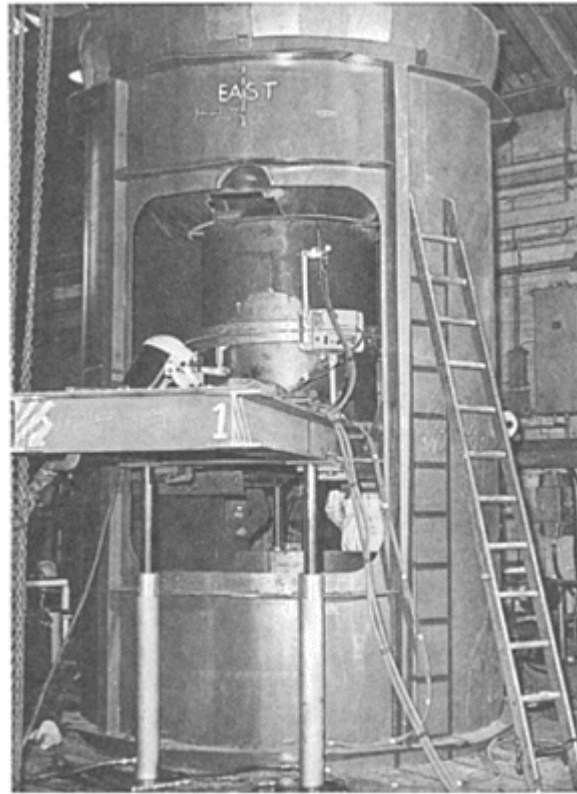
Full scale model of lower end of ammonia converter. This rig was built to provide access for welding, cutting, testing and heat treatment to facilitate replacement of inlet forging.
